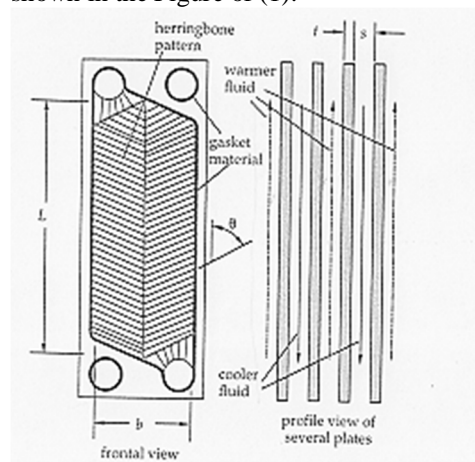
Frontal view of a plate and frame heat exchanger[1]
